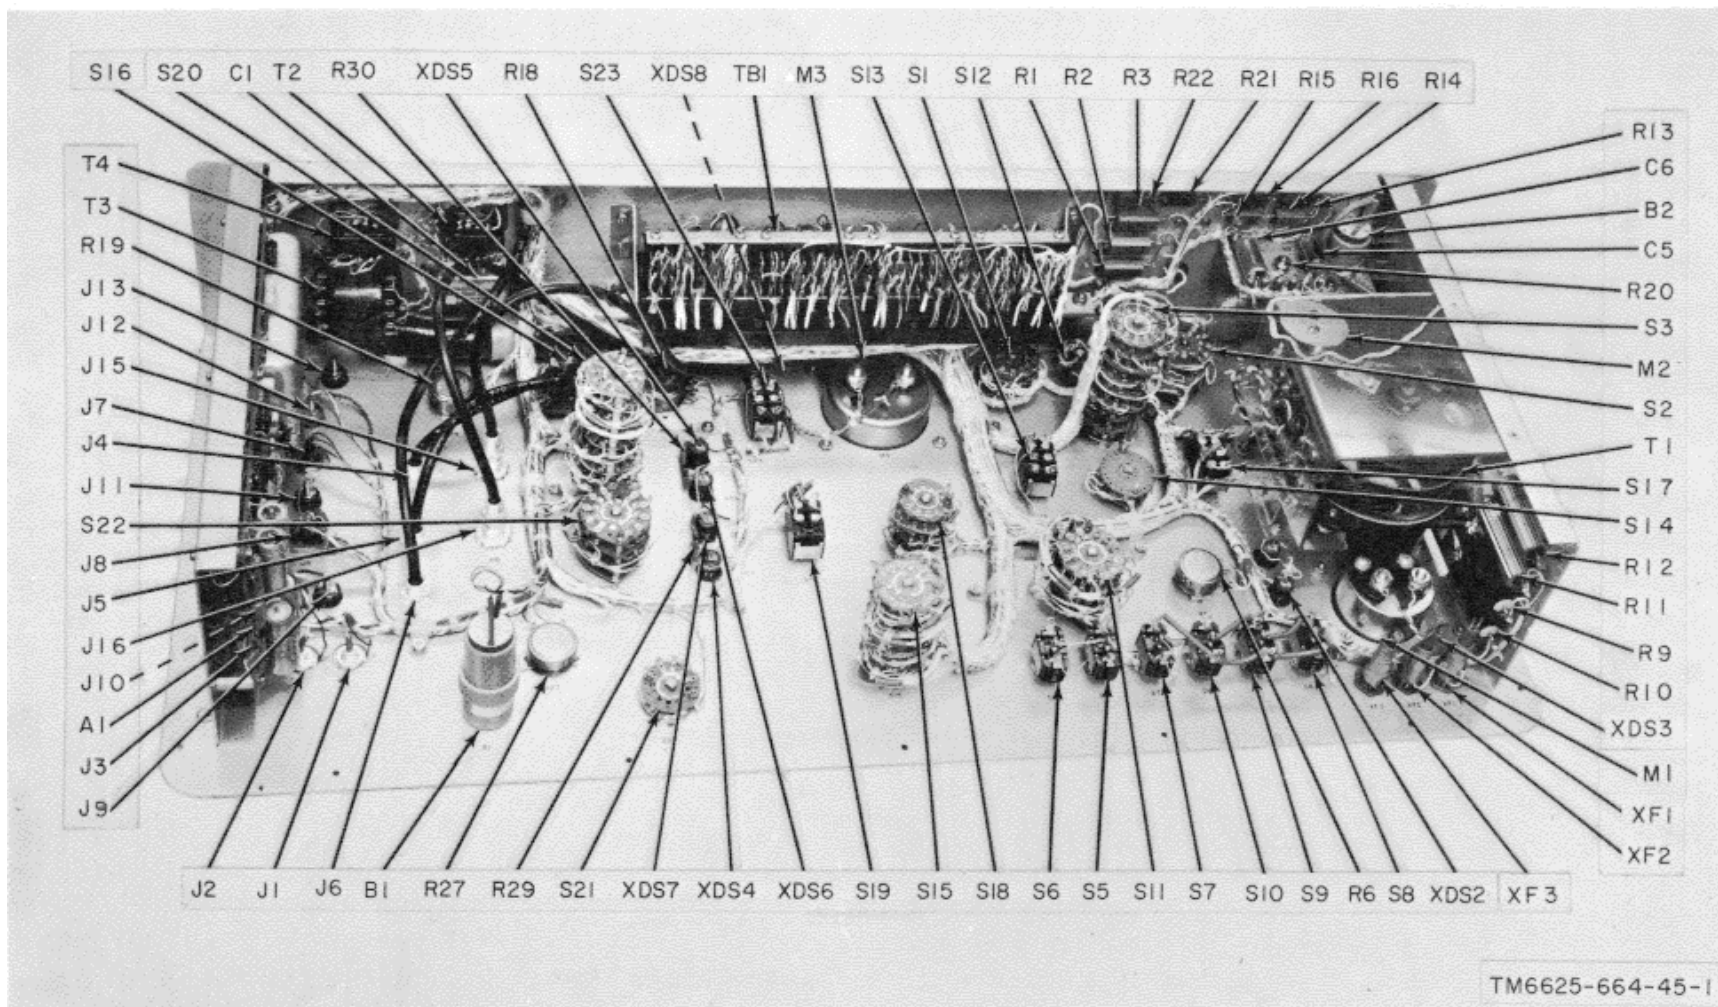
Test Set, Radar AN/APM-247, inside view, parts location
